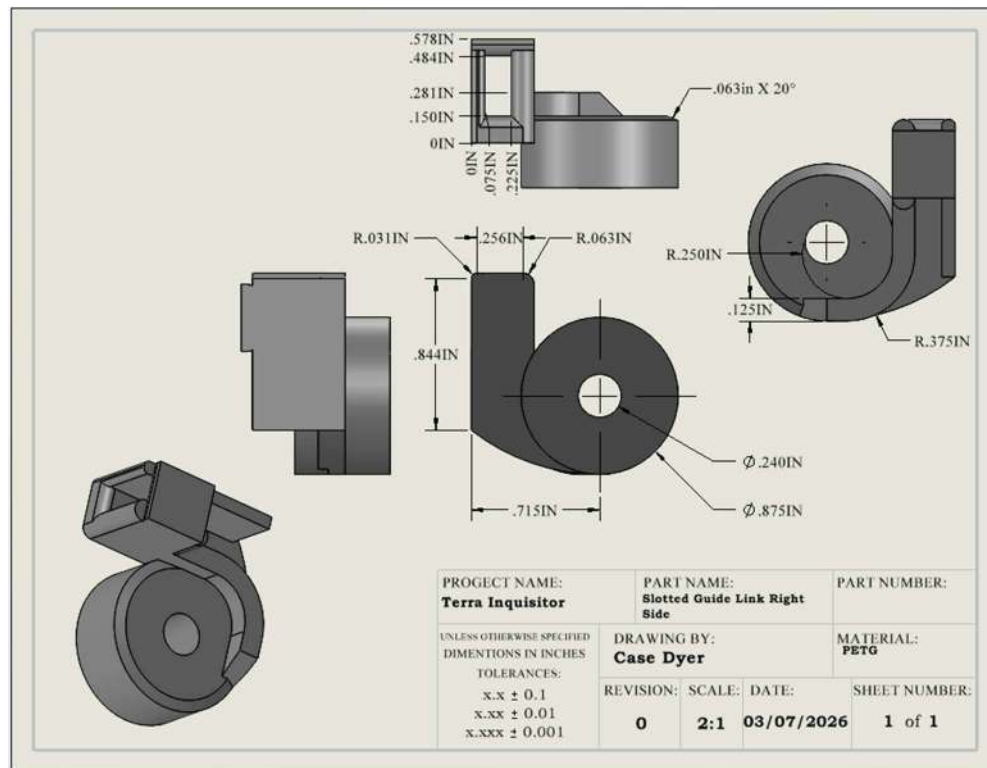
Right Side Slot Link Guide Detailed Drawing
